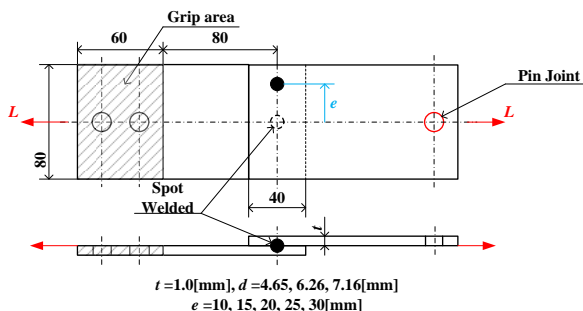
Spot-welded specimen under eccentric tensile shear
